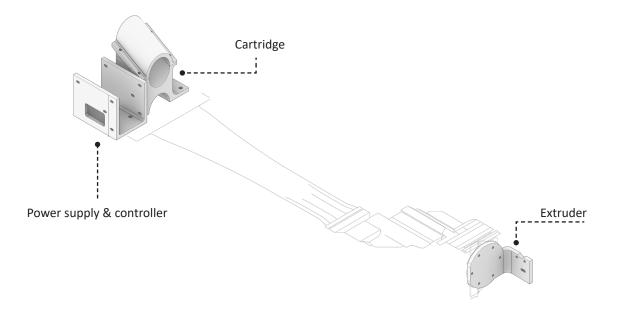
Designed mounting on the robot arm are 3d printed later to fit on the robot and fix the tools mounted over it (Source: Author)
